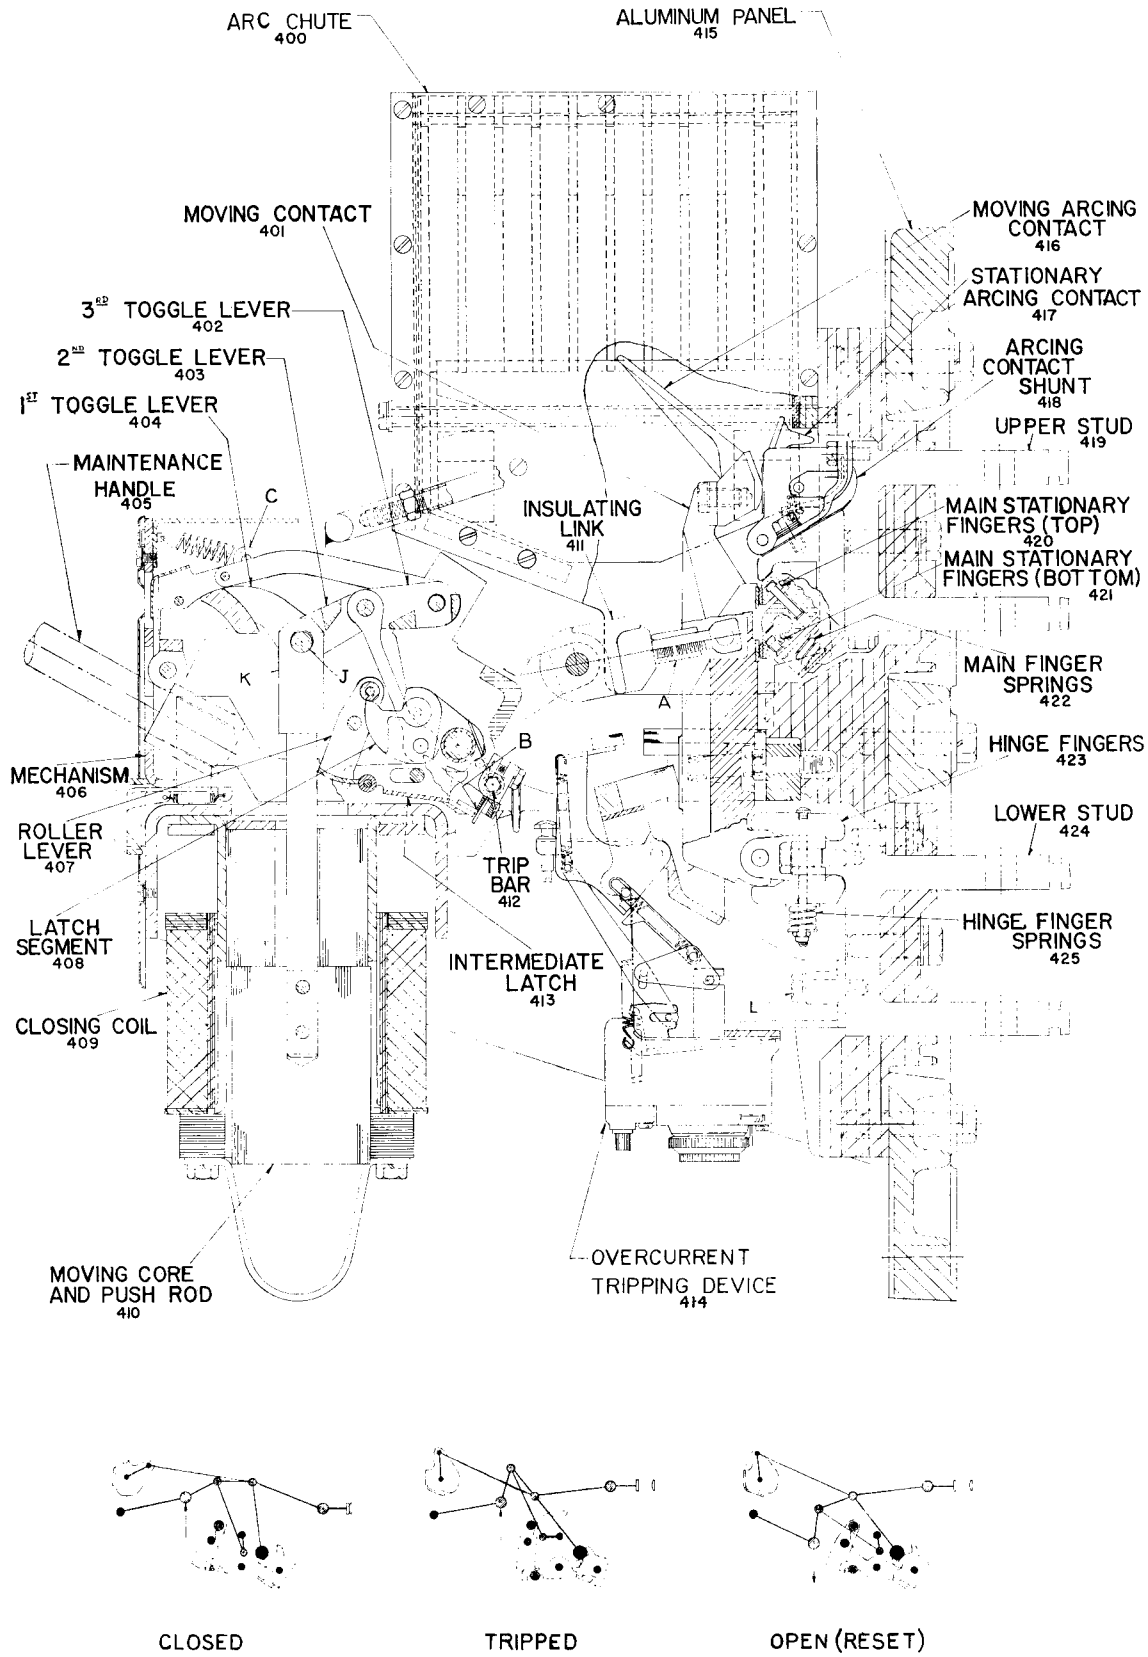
Cross-Sectional View of Air Circuit Breaker
